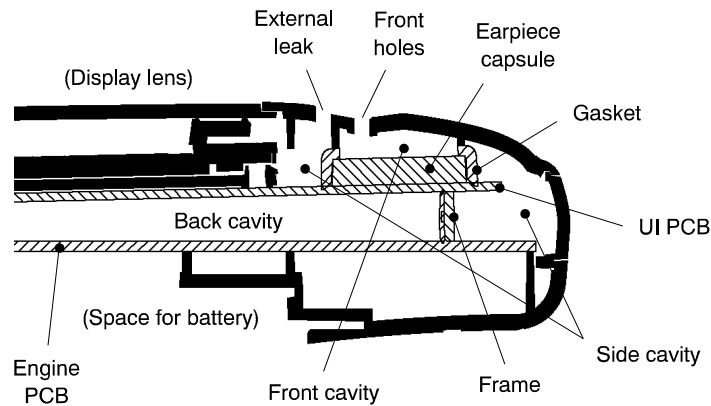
Cross-section (from a CAD file) through the earpiece of the Nokia 6110, showing the final mechanical construction. The back holes and UI PCB holes are not visible in this drawing.
